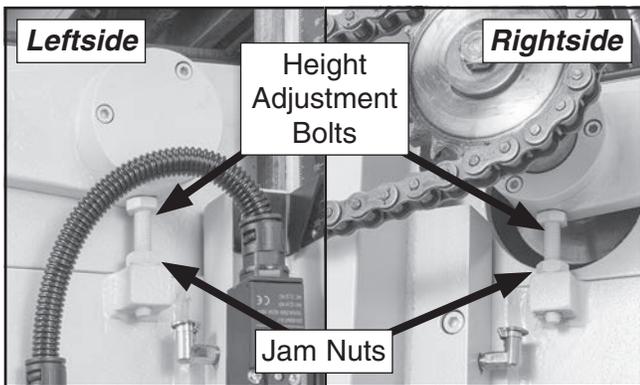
Location of rear lower pressure roller height adjustment hardware.
